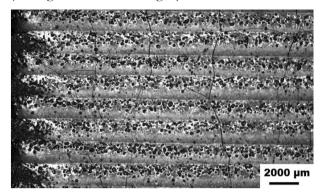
Cracks on the surface of the weld cladding coating made using standard VÚTS's process parameters
